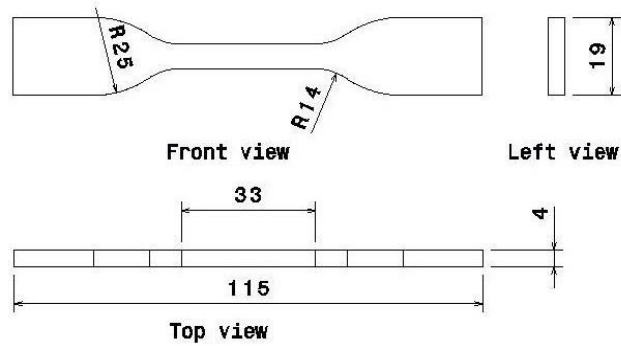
Test specimen for tensile test in accordance to ASTM D638. [5] (All dimensions are in millimeter)
